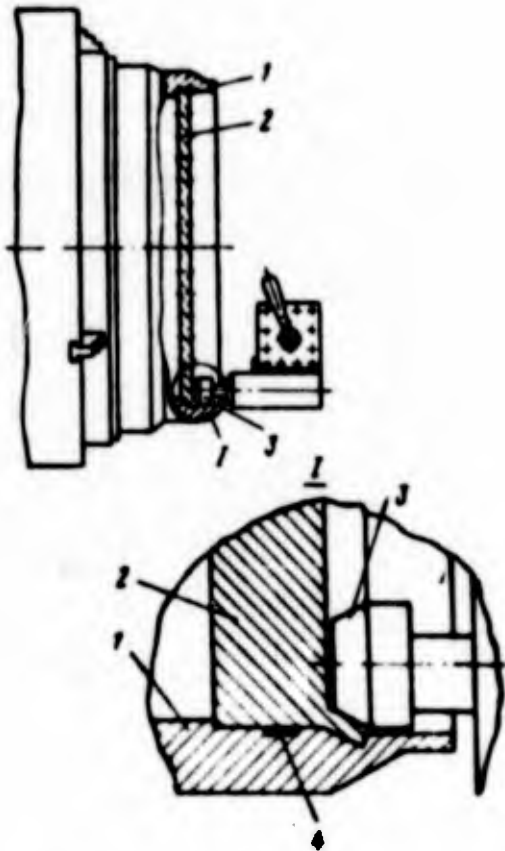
Rolling out of flame dome. 1) head casing; 2) dome; 3) roller; 4) solder.
